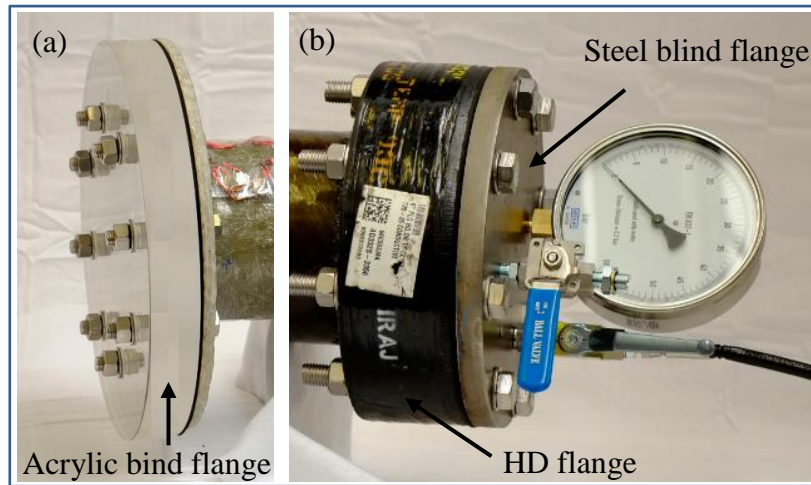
HD and blind flanges: (a) Acrylic blind flange attached to the fabricated flange and (b) HD and steel blind flange attached to the HD flange.
